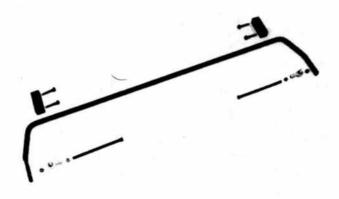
Rear Stabilizer Bar and Bar Installation Kit.
